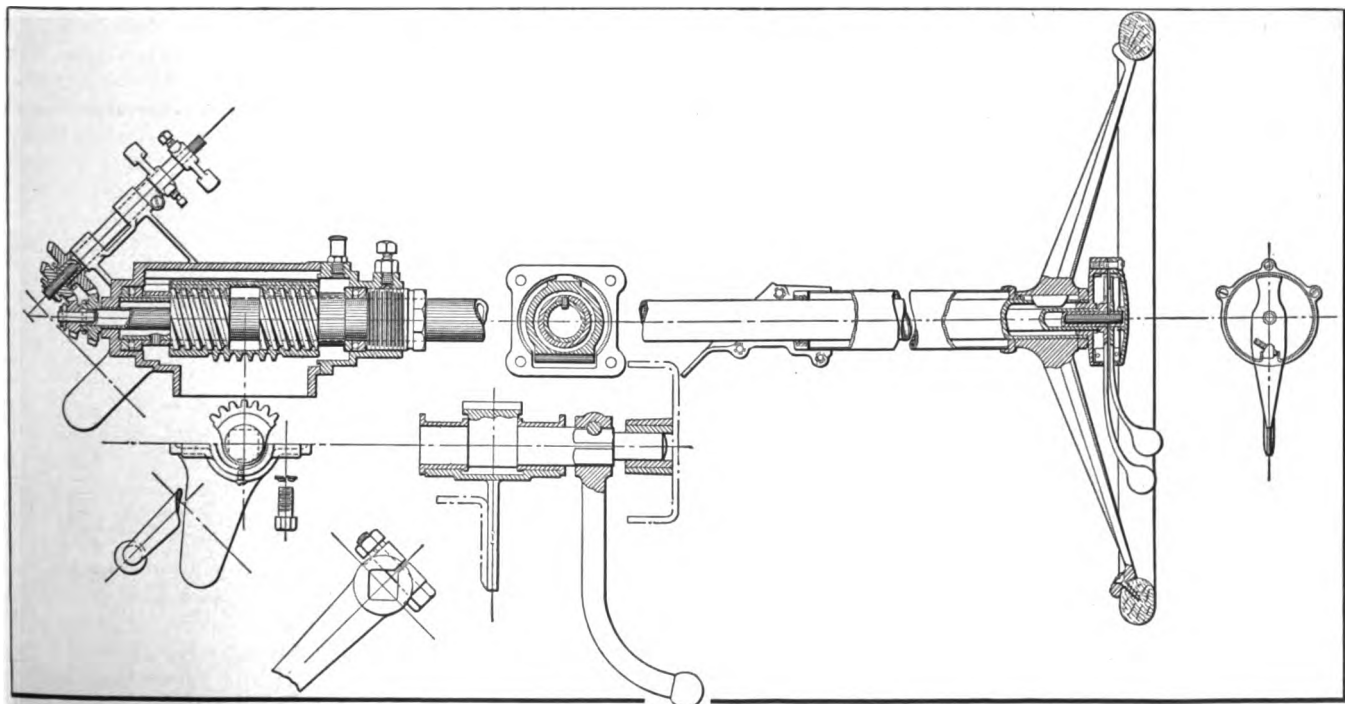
Section through complete steering gear, showing double worm, hand wheel, and spark and throttle arrangement
